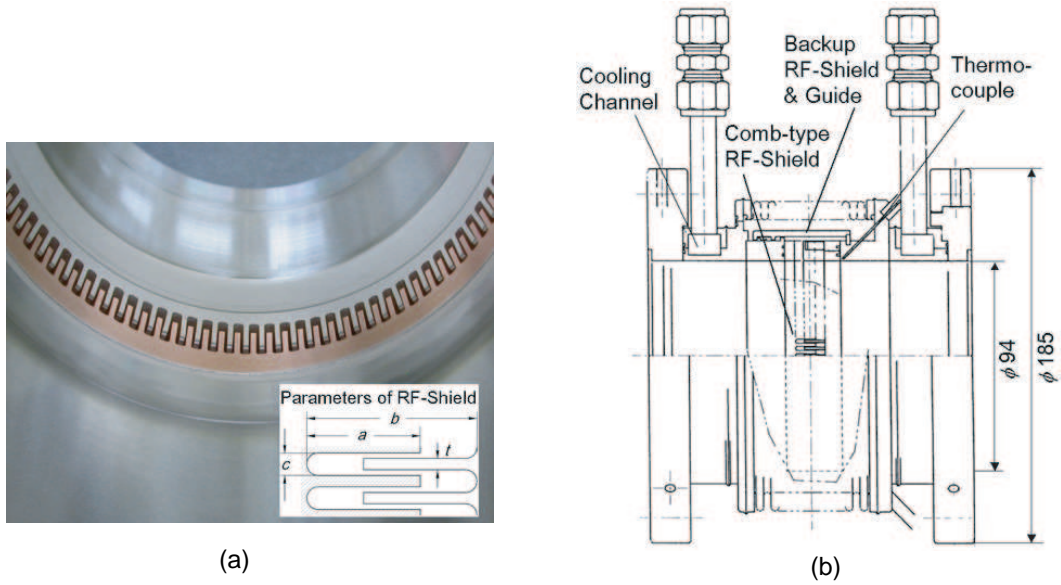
(a) Comb-type RF shield. (b) Prototype of bellows chamber with a comb-type RF shield.
